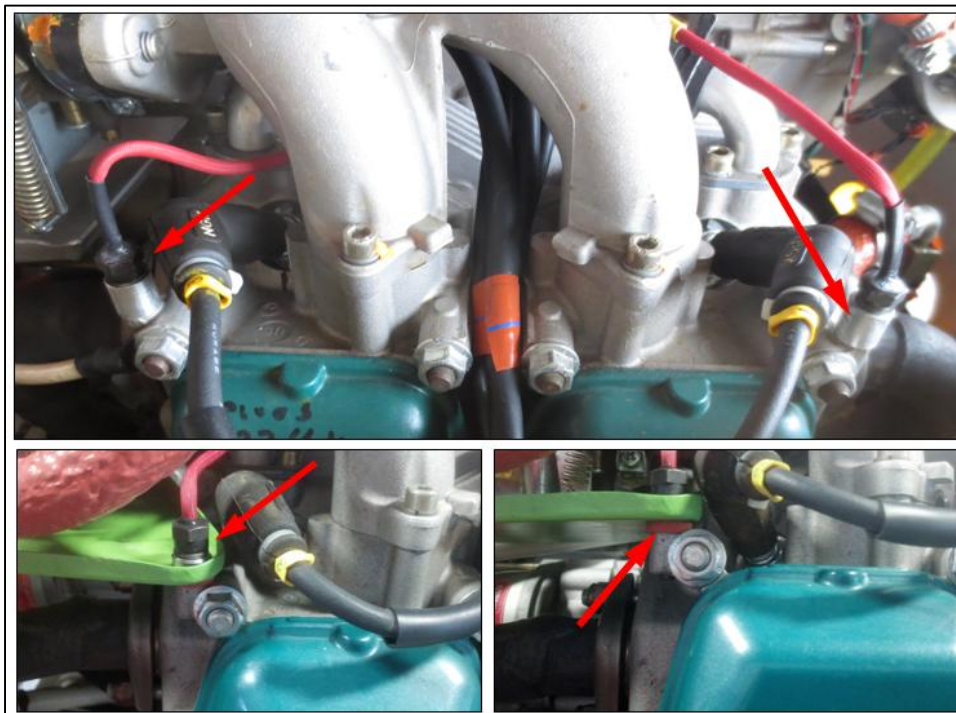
Examples for locating plug and optional indicator. Top two pictures depict shore plug supplied with kit secured with cushioned clamps and optional circular plug bracket, bottom pictures optional flush plug configurations.
